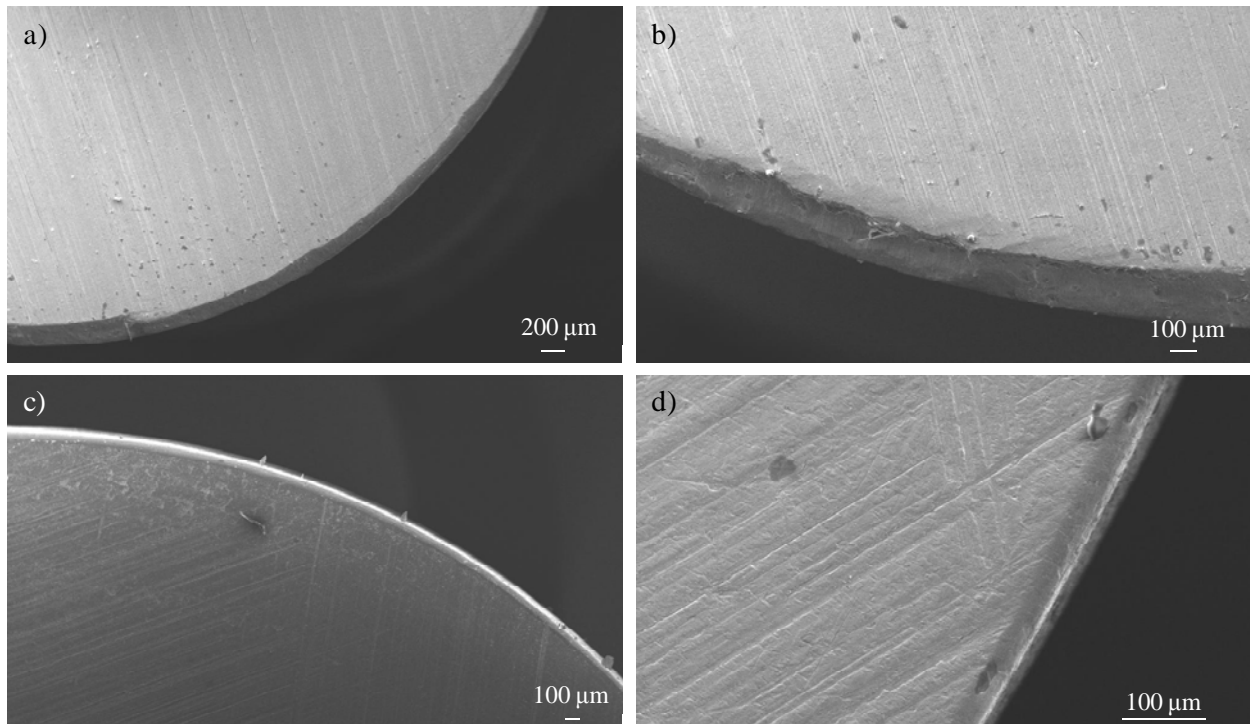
Fractography of the 1.2379A punches after 3000 strokes: a) and b) sharp edge (radius 10 μm); c) and d) rounded edge (radius 100 μm)
